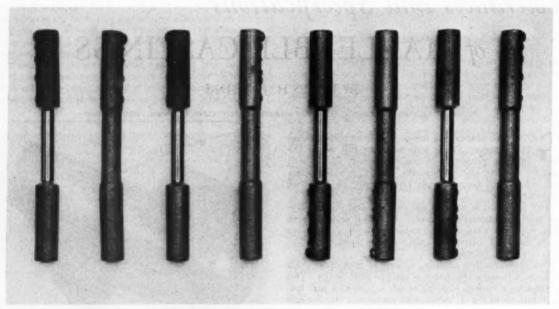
FULL-SIZE AND REDUCED-DIAMETER TEST SPECIMENS
